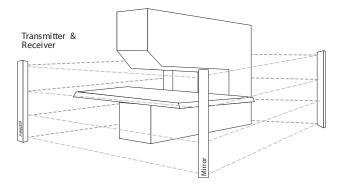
Correct PA4600/PA4600BB Installation Example
